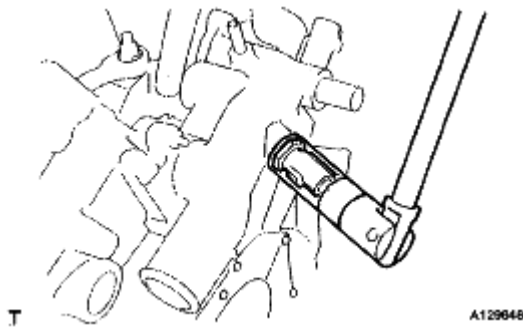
Identifying EFI Engine Coolant Temperature Sensor
